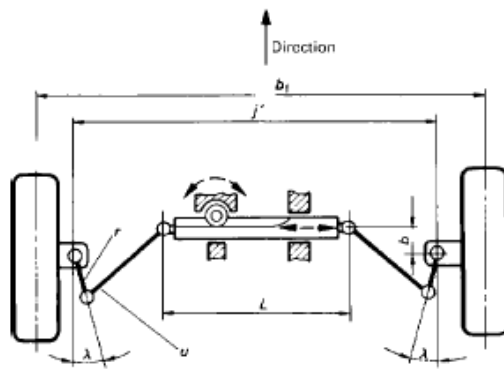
Rack and pinion schematic with tie-rod connection inner than wheel center [56]
